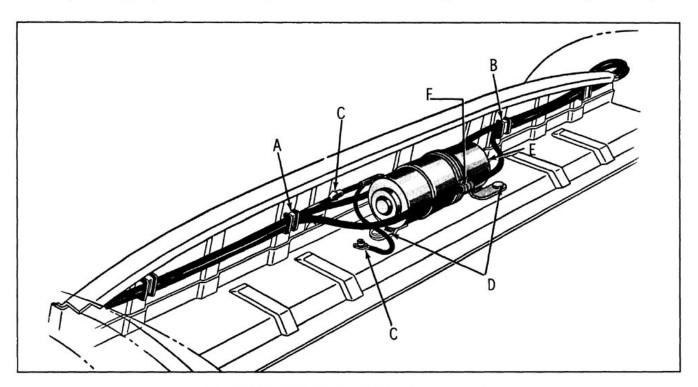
Hydro-Lectric Motor and Pump Assembly
